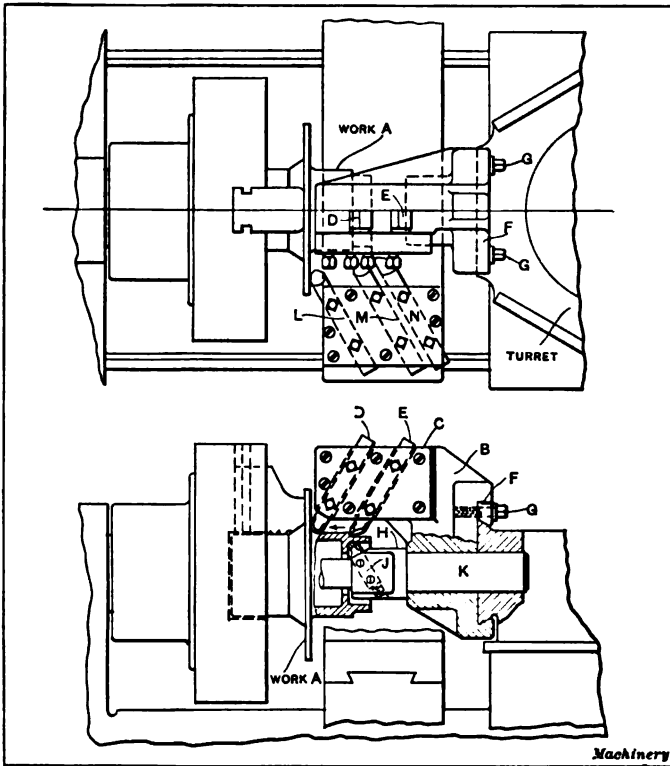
Multiple Tool-holder for machining Automobile Hubs
